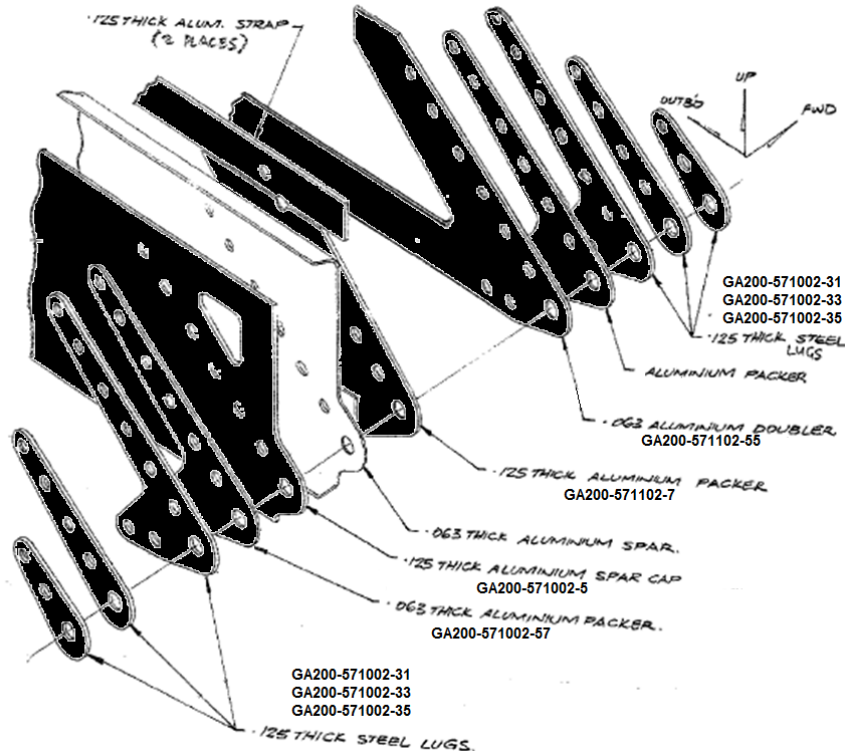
Front Spar Root Fitting exploded view; LHS shown
